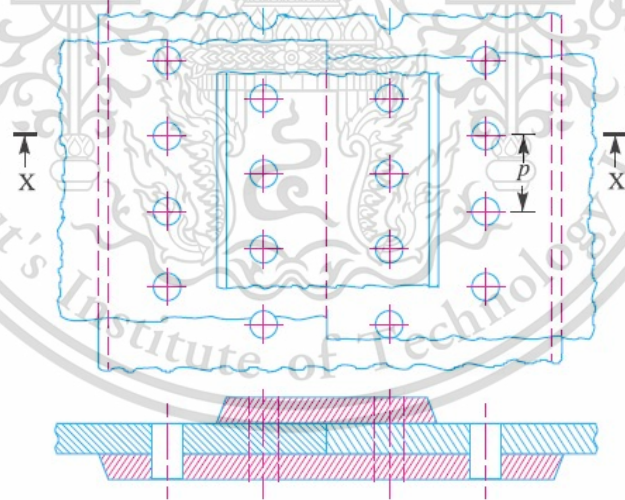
Double riveted double strap (unequal) butt joints with zig-zag riveting
